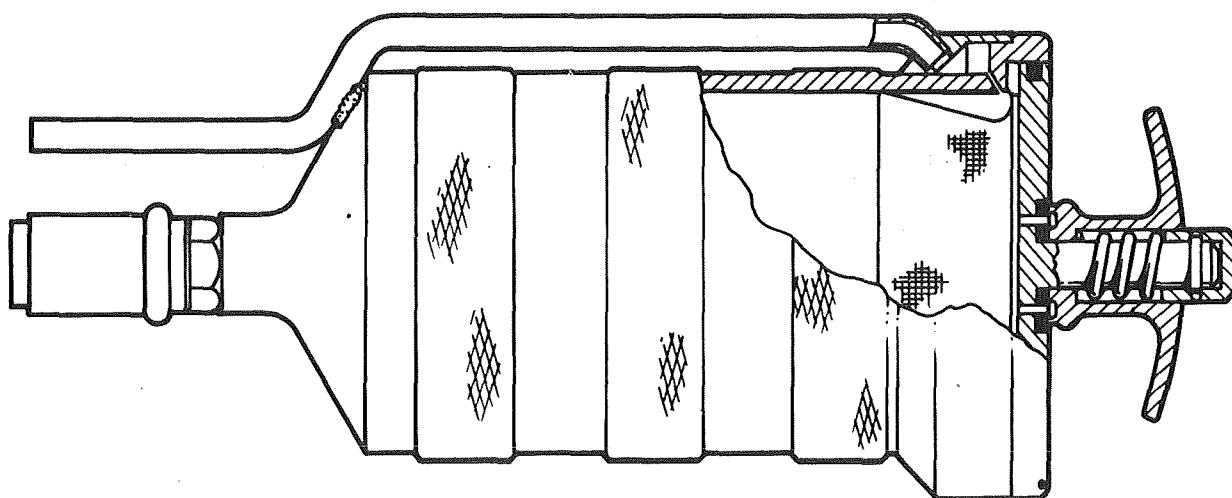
Prototype urine-receptacle assembly with integral rinse.
